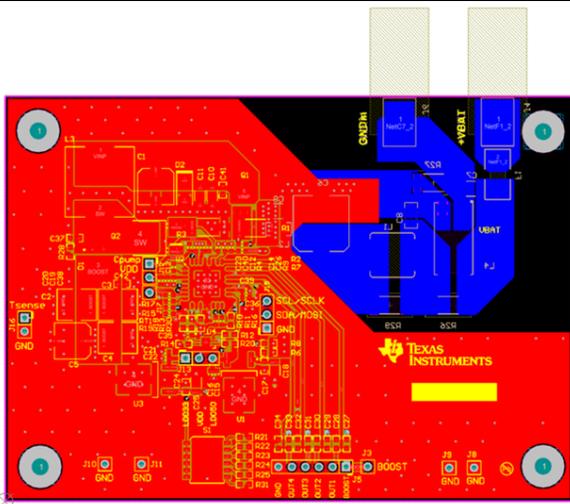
Top Layer of PCB Layout of LP8860-Q1 EMI Test Board
